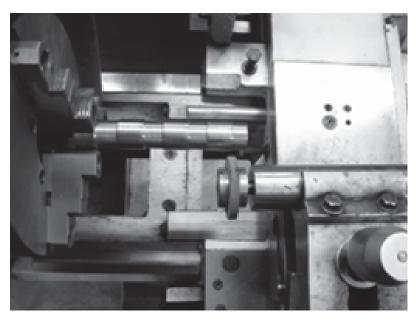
The view of working assembly (machine tool, fixture, object, tool) - grinding
